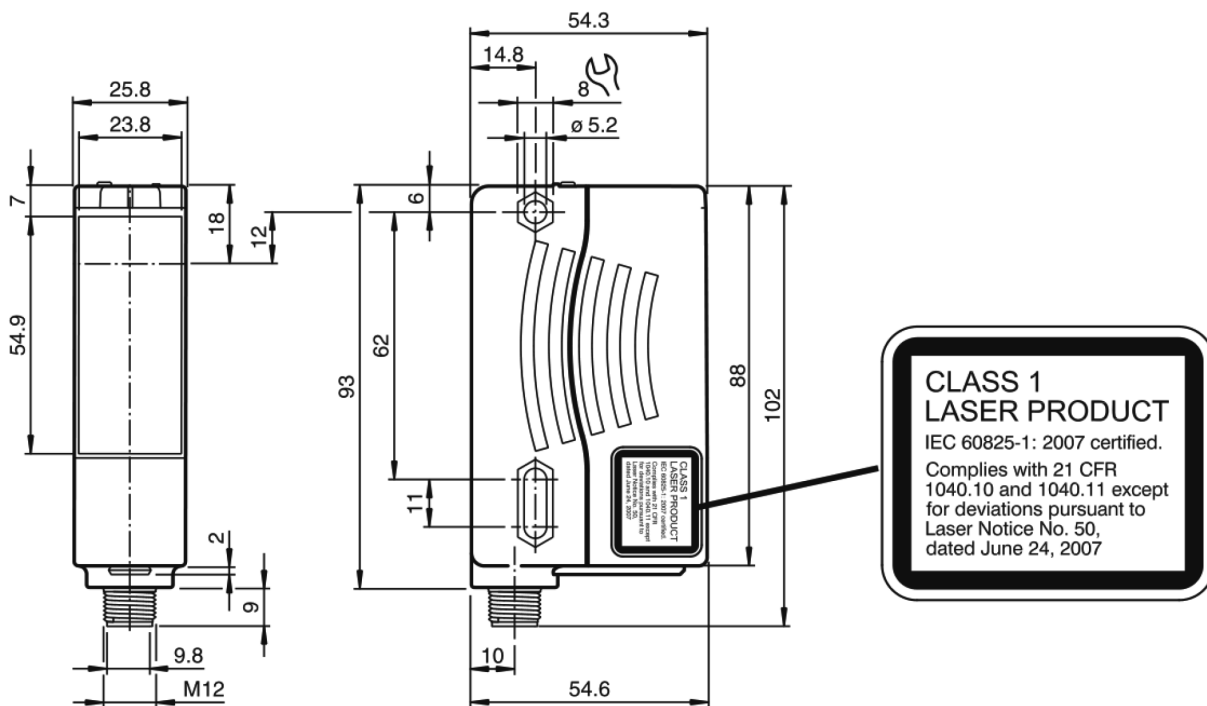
Laser Sensor (P/N: LGM-HEAD) Dimensions (mm)
